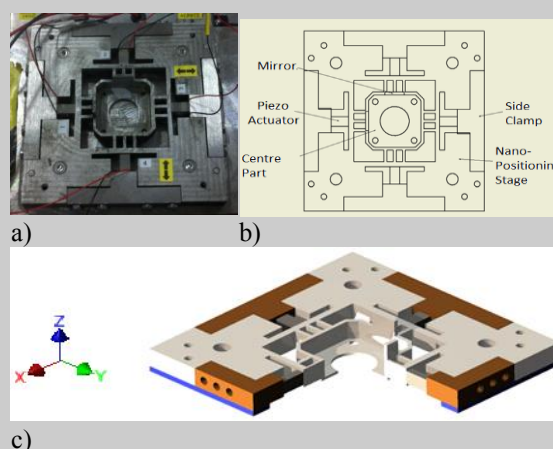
Bristol TDFM 1st high-speed-stage Prototype: a) 1st High Speed Stage Prototype; b) 1st High Speed Stage's Schematic; c) $3/4$ Section of the 1st High Speed Stage prototype showing z-axis asymmetry with plate at bottom in the centre part
